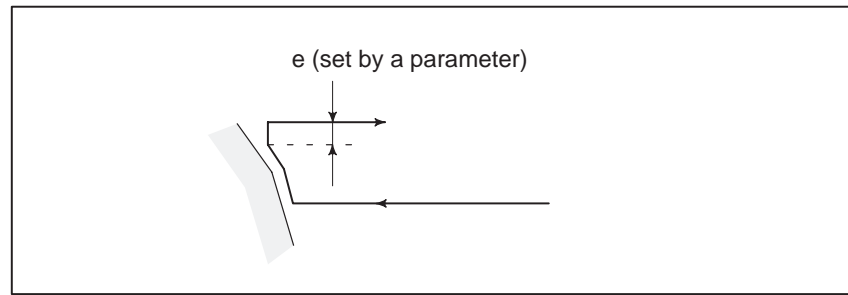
(e) Chamfering in Stock Removal in Turning (Type II)
